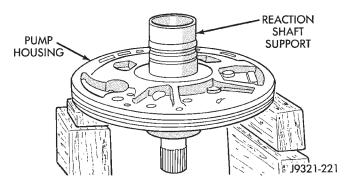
Assembling Reaction Shaft Support And Pump Housing
